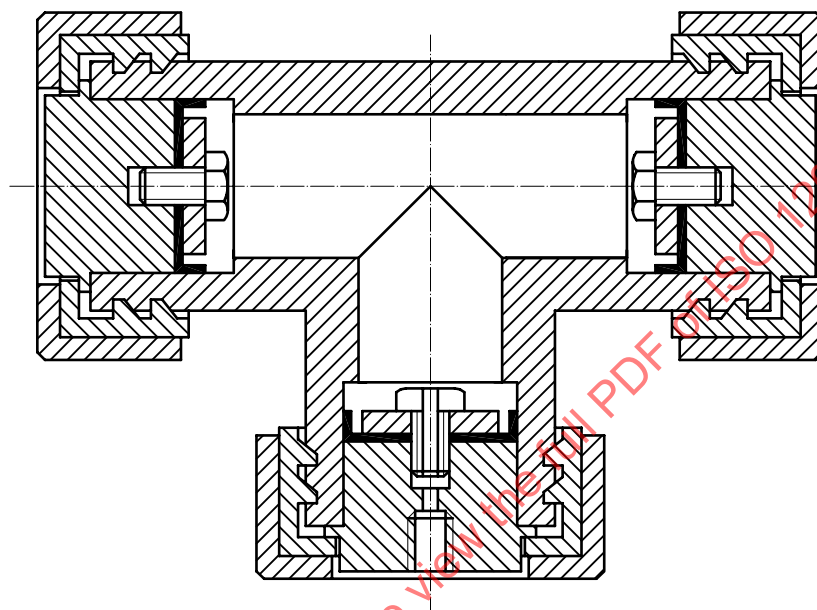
Example of a pressure-tight test piece assembly with mechanical joints involving external milled grooves and with hydrostatic end thrust
